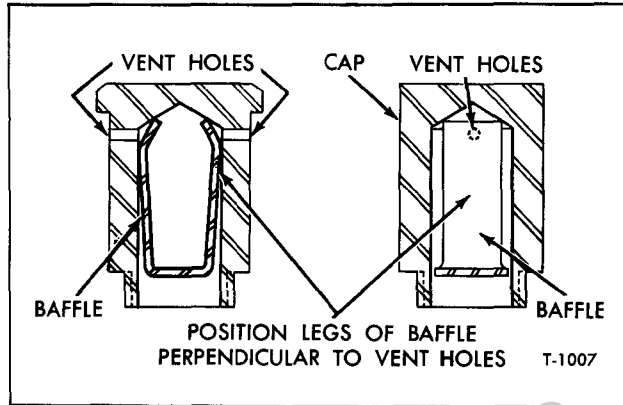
Master Cylinder Filler Cap Baffle (Steel Tilt Cab Models, Except TM 80 and TV 70)
